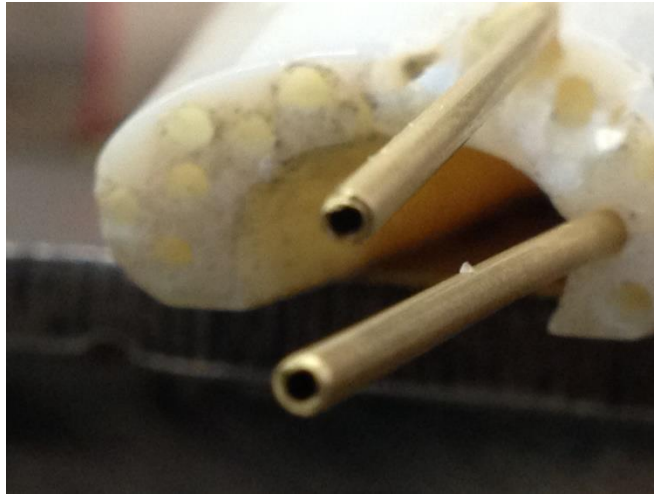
1/16 in. tubing connected to 1/8 in. channels
